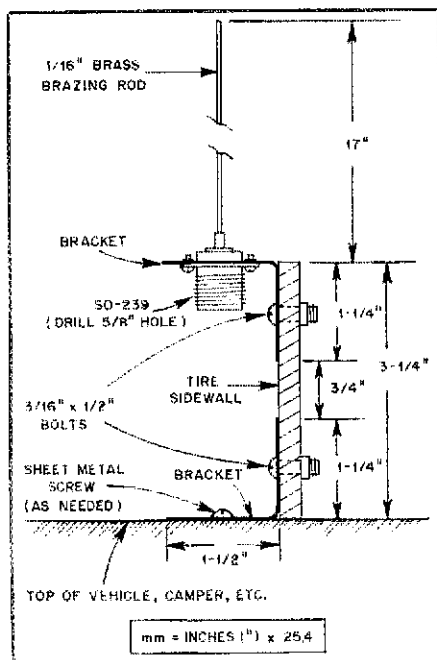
Construction details of a flexible mount built by N5DHN for his 2-meter mobile antenna.
